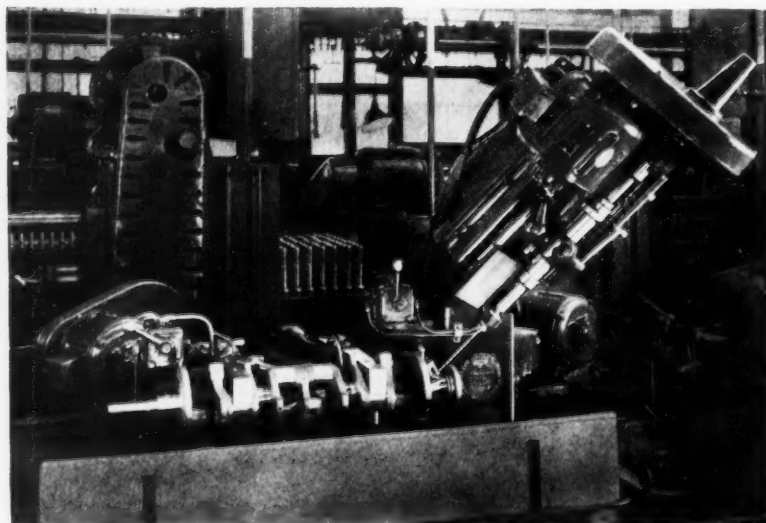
Another Deep-hole Drilling Machine which Produces Two Long Holes at Angles in the Cast-alloy Lincoln-Zephyr Crankshafts
